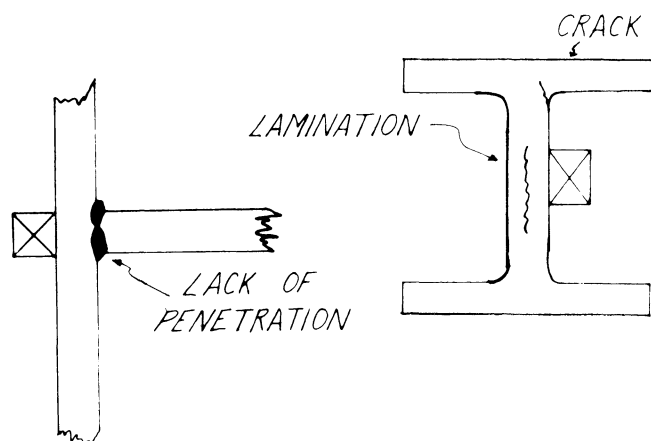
T-joint weld penetration and I-beam integrity are easily inspected using a straight beam ultrasonic transducer
